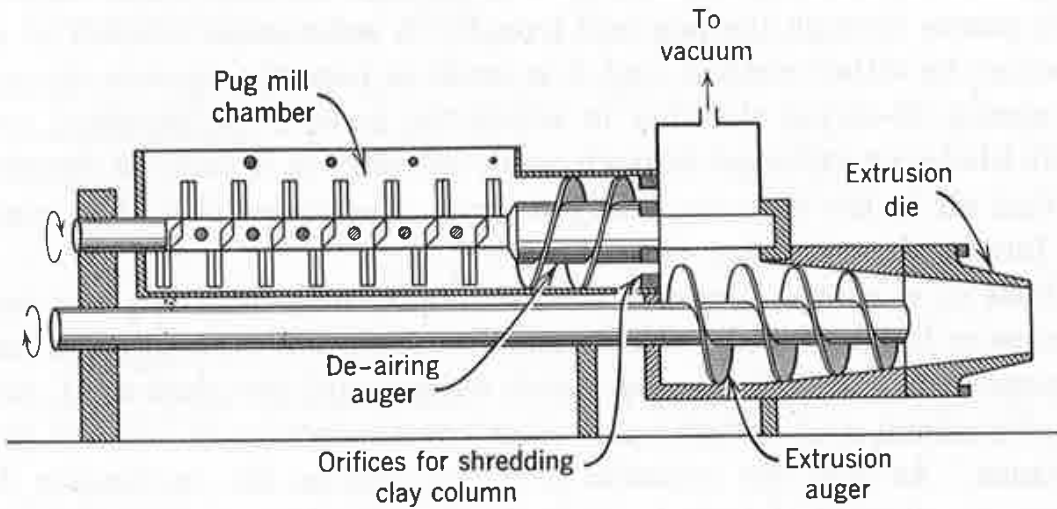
Cross section of a pug mill, vacuum de-airing chamber, and auger extrusion die. Pugged clay is forced through shredding orifices into vacuum chamber and then extruded through die of proper shape.
